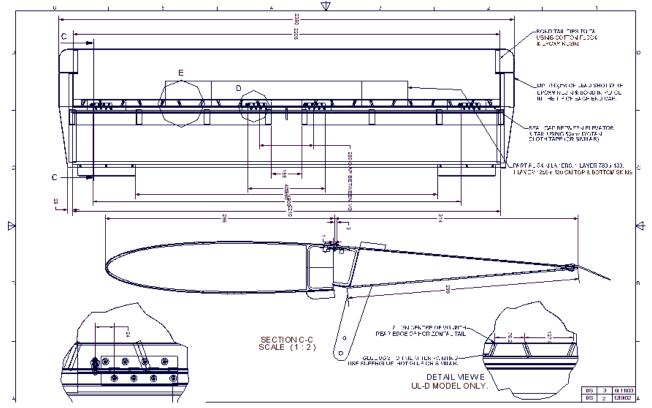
J160 Models – Horizontal Tail & Elevator Assembly (J120, J160)
